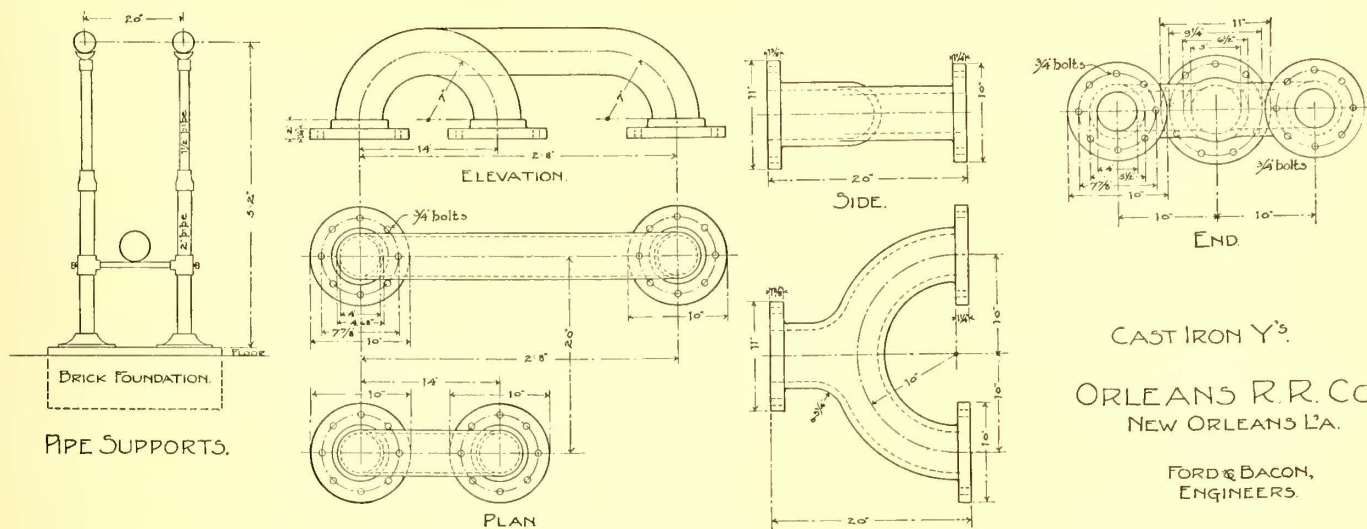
DETAILS OF PIPING—ORLEANS RAILROAD.
